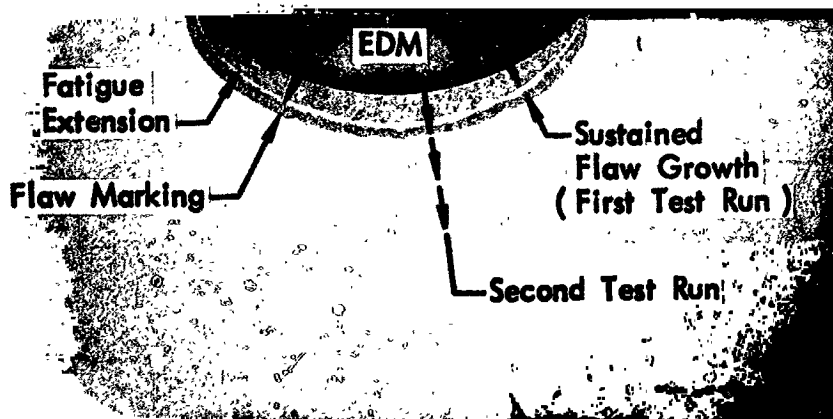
FRACTOGRAPHS OF 2219-T87 ALUMINUM SPECIMENS
